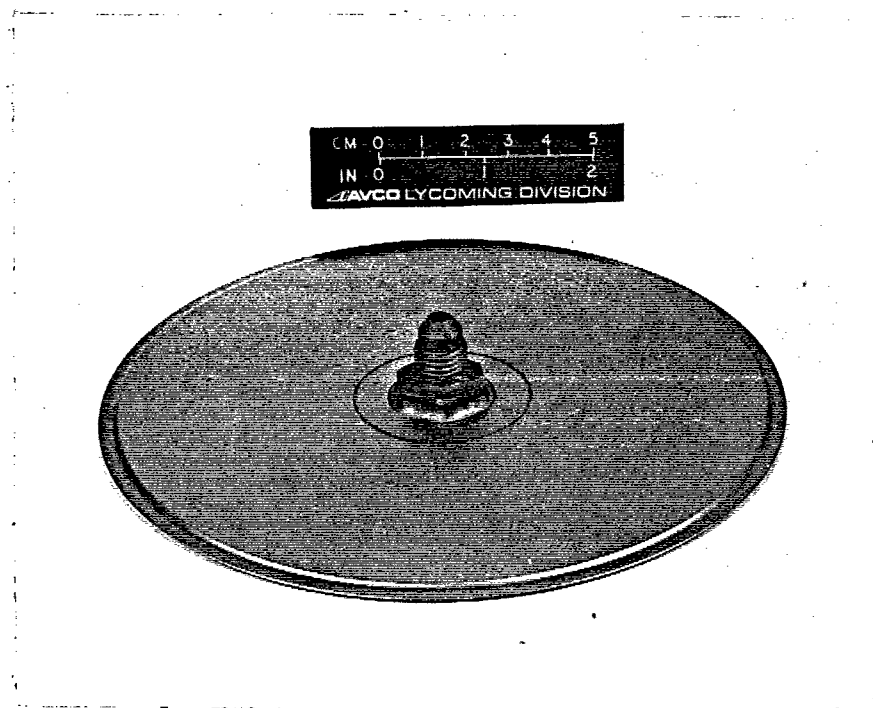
Internal Pressure Fatigue Test Specimen ("Pillow" Specimen)
